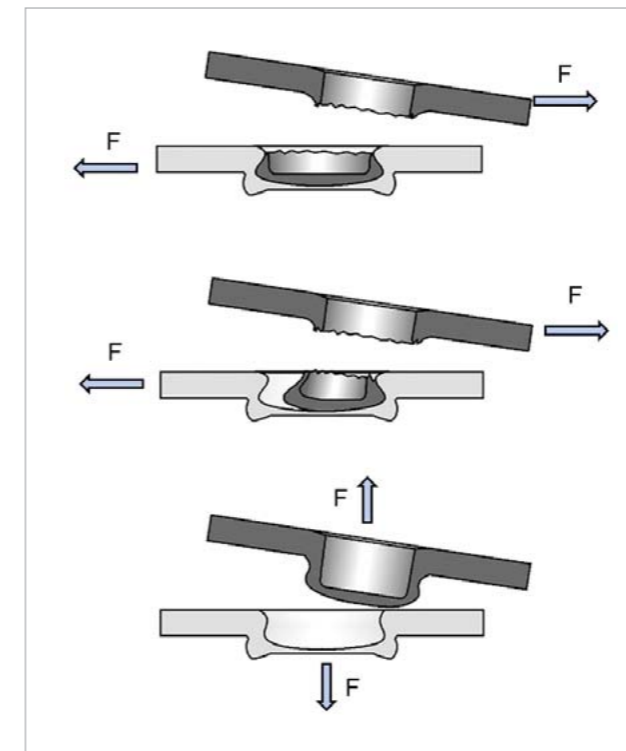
Failure types after loading the clinching point load according to DVS (2009) neck fracture (top), pull-out failure (bottom) and multiple failure (center)
